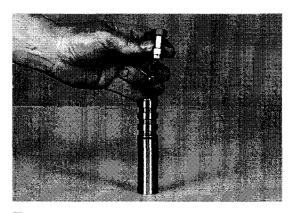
Install regulator spool stop, spring and regulator spool and sleeve assembly in housing sleeve.
